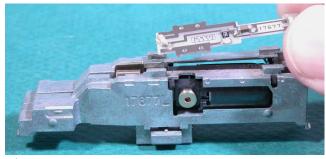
With clips removed from the board, the circuit board slides forward and can be removed.
